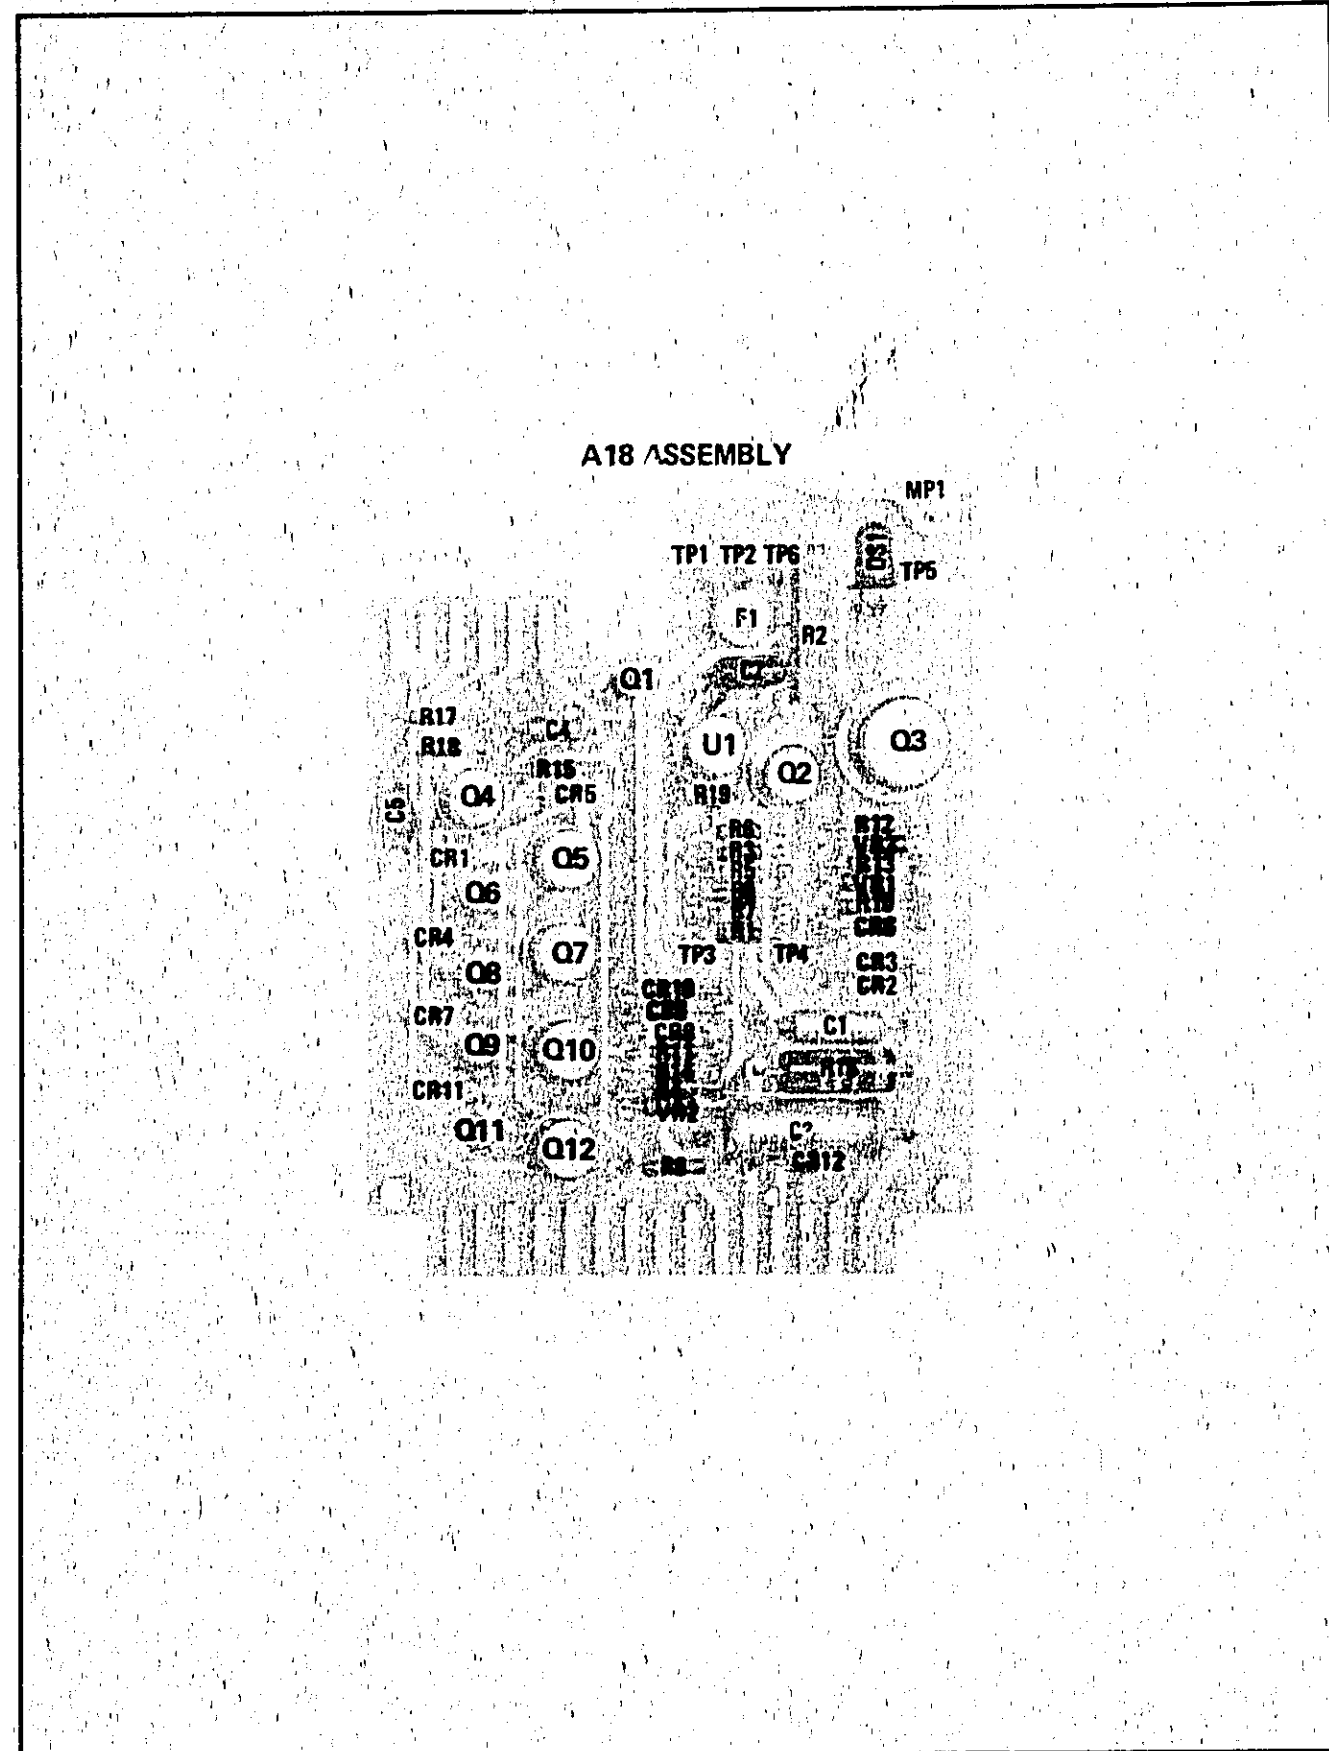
A18 -5.2V Regulator and Fan Driver Assembly Component Locations
